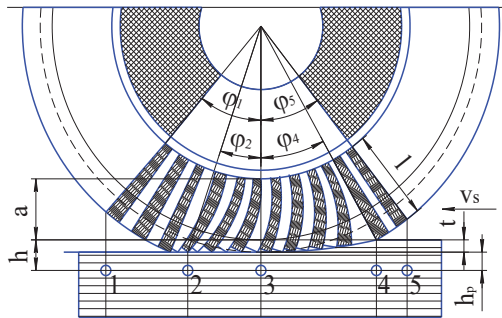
The sectors of needle contact with the surface of a PCW workpiece
